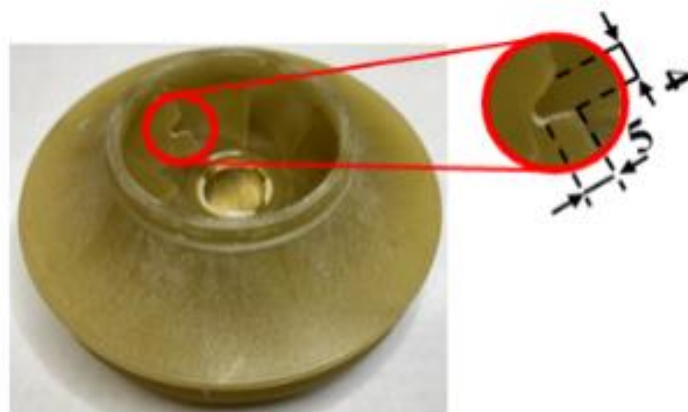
Implementation of the fault *impeller crack
